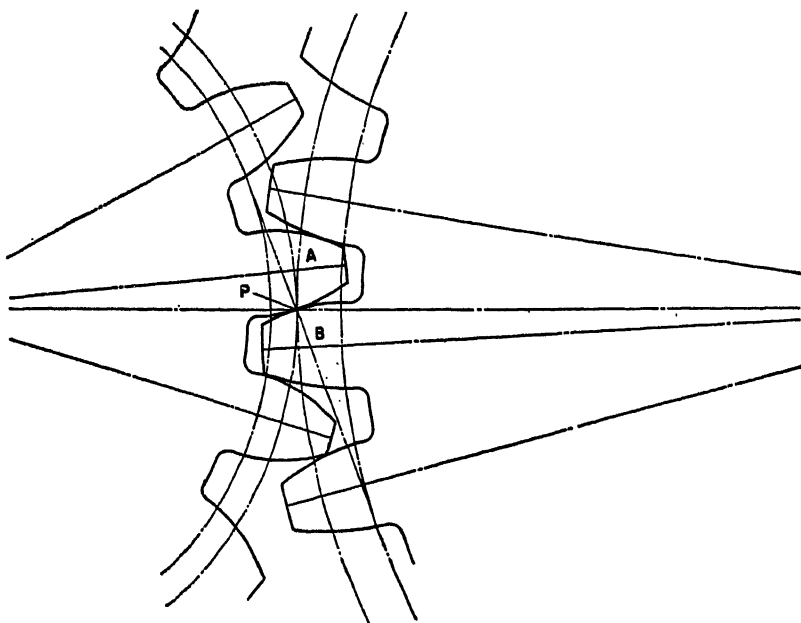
Gear Tooth Engagement—Action at Pitch Point.
